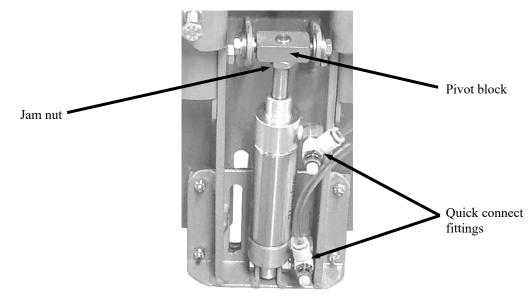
Bag Clamp Cylinder (1 of 2 shown)
